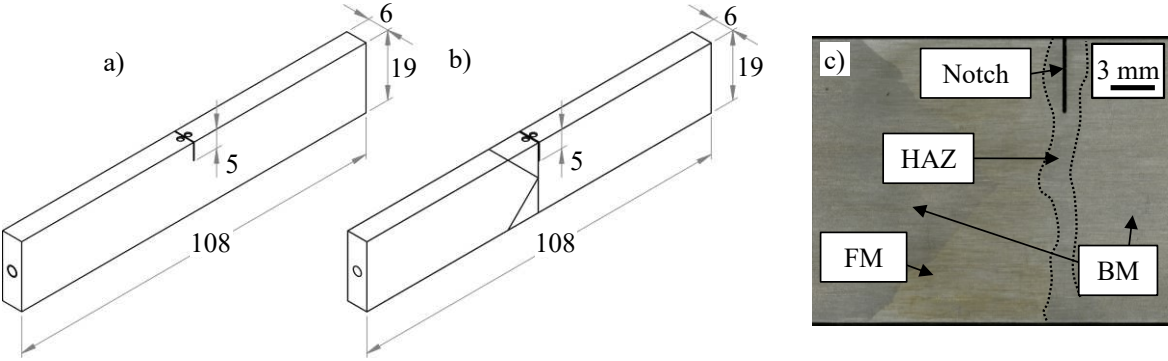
SENB geometry. Specimens made of: a) S355J2+N and S690QL; b) welded S355J2+N, with the EDM notch inside the HAZ; c) macrography of one welded specimen showing the EDM notch location
